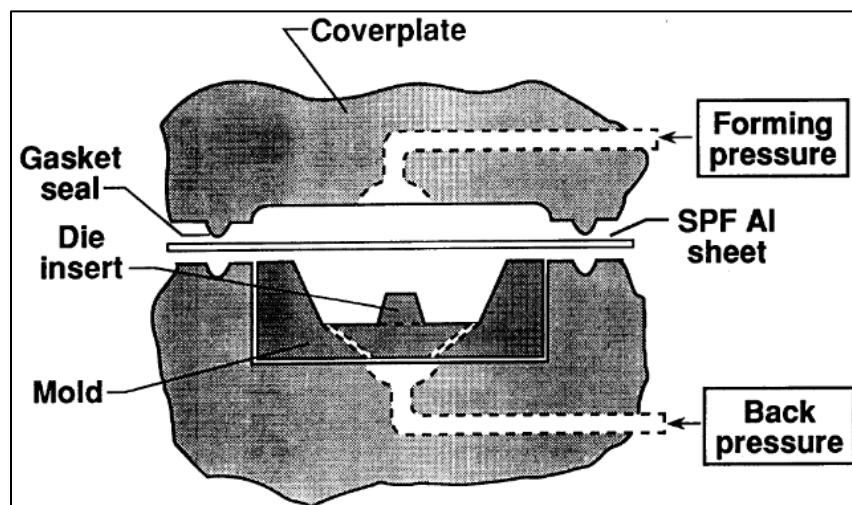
Schematic of mold, cover plate and die insert.
